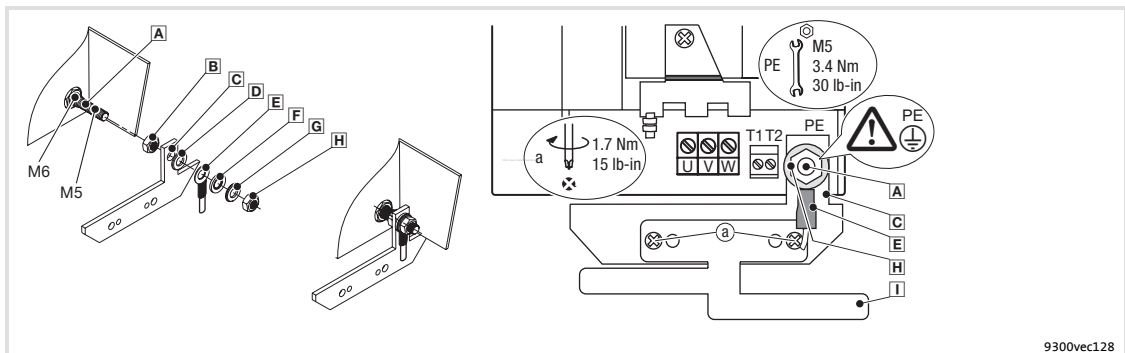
Installation of shield sheet for drive controllers 0.37 ... 11 kW
